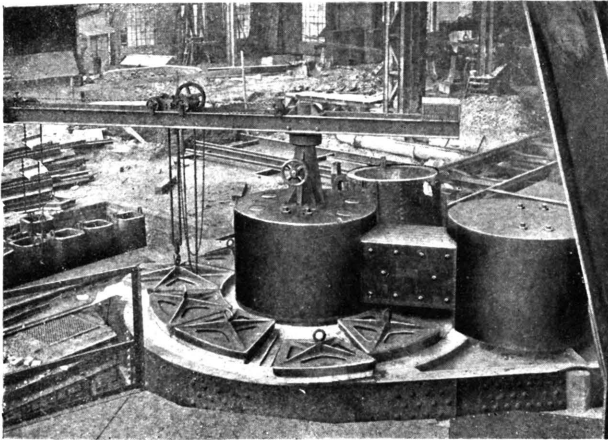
Top view of same, showing covered groove containing the melted metal.
